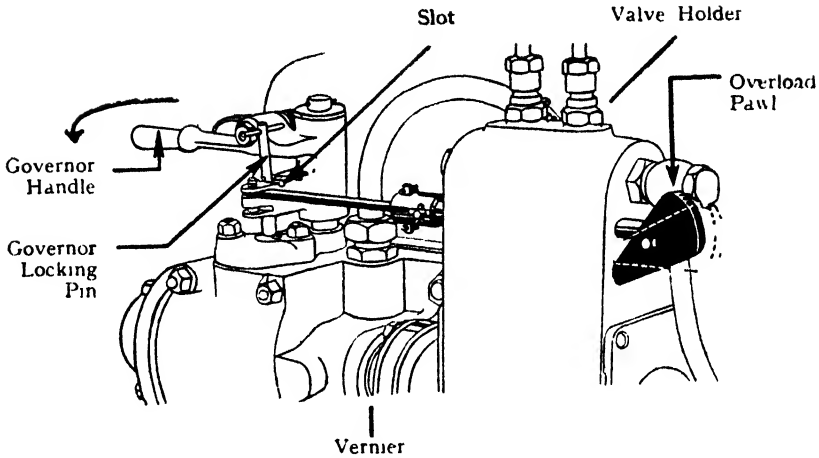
FUEL PUMP, OVERLOAD, PAWL AND GOVERNOR HANDLE (R. A. Lister & Co., Ltd)
